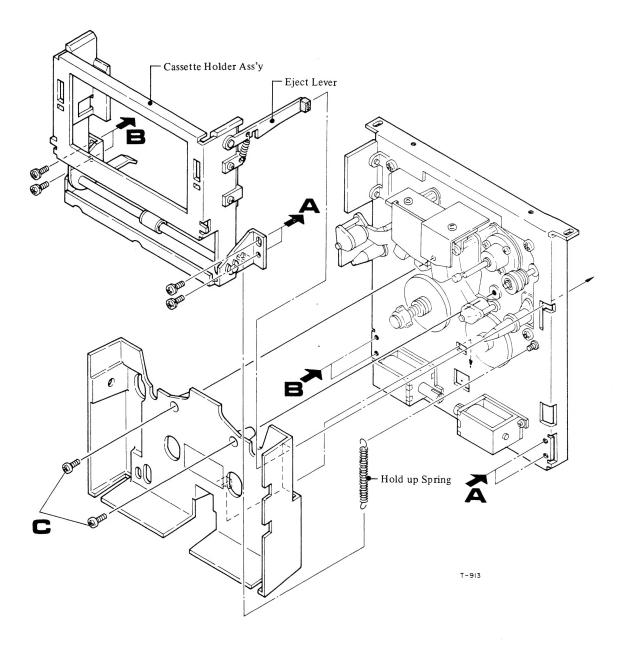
Cassette Holder and Base Ass'y Mask Removal
